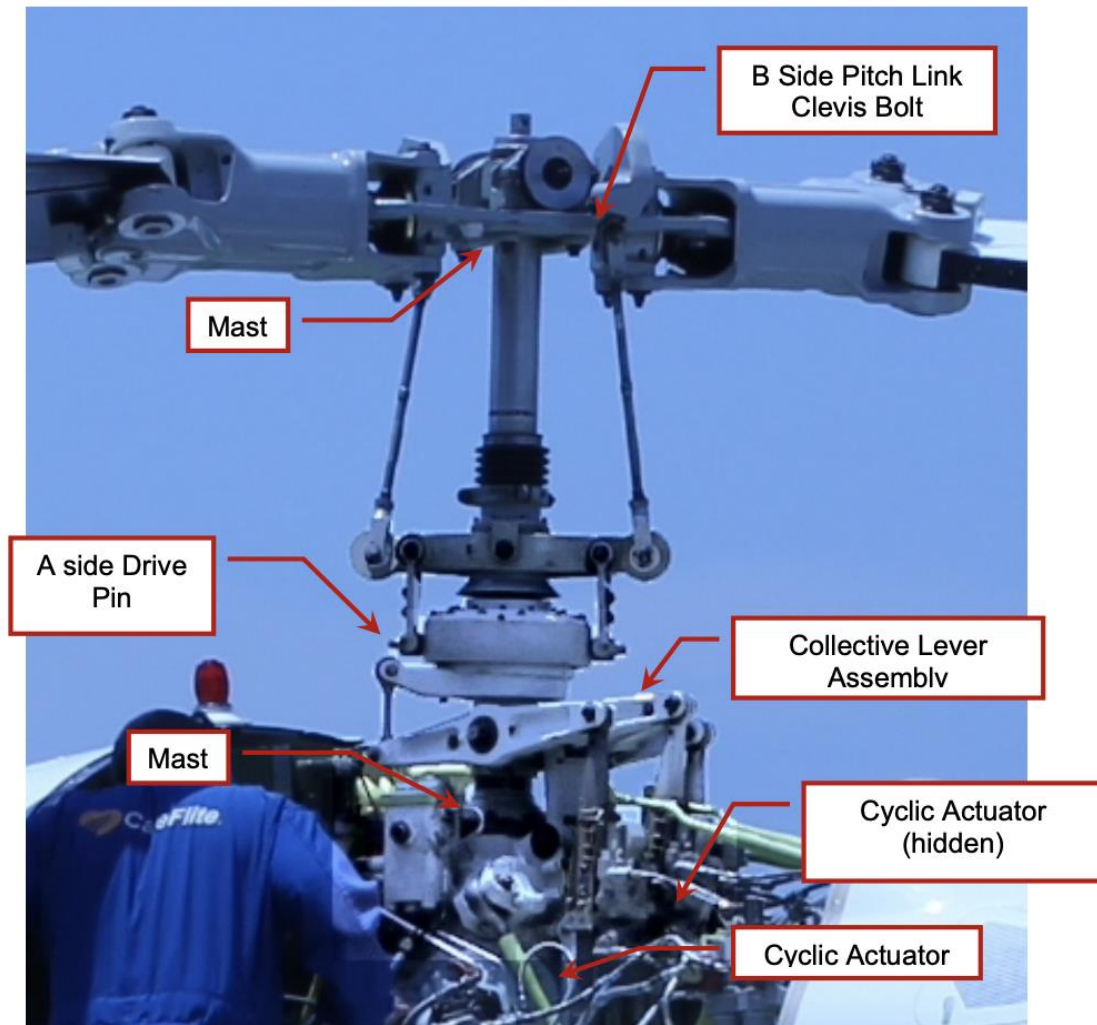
Image showing the rotor head of the Bell 222U helicopter before the accident, with critical components identified [211].
